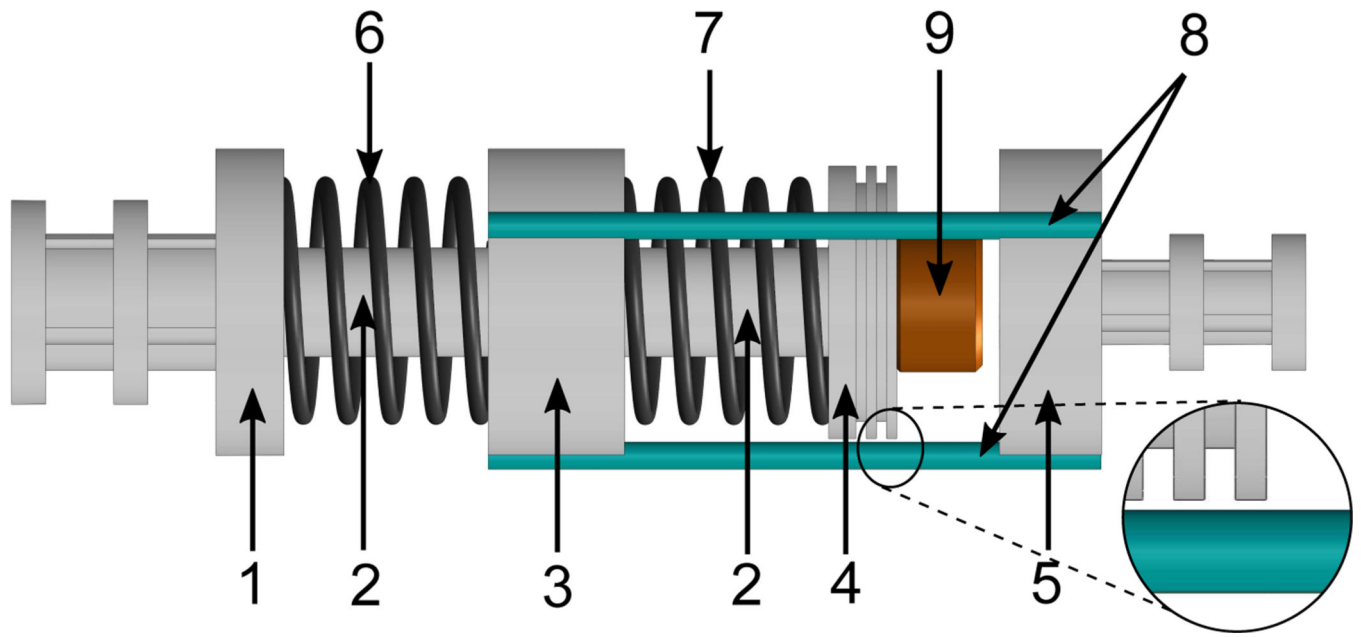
Mechanical design of the SMA-based torsion actuator including (1) base disk, (2) sheath, (3) torsion disk, (4) top disk, (5) output disk, (6) SMA A, (7) SMA B, (8) supporting rods, and (9) shaft (bolt, thread size: 4–40). All disks and sheaths are made of VeroWhite using an Objet 350V 3D printer.
